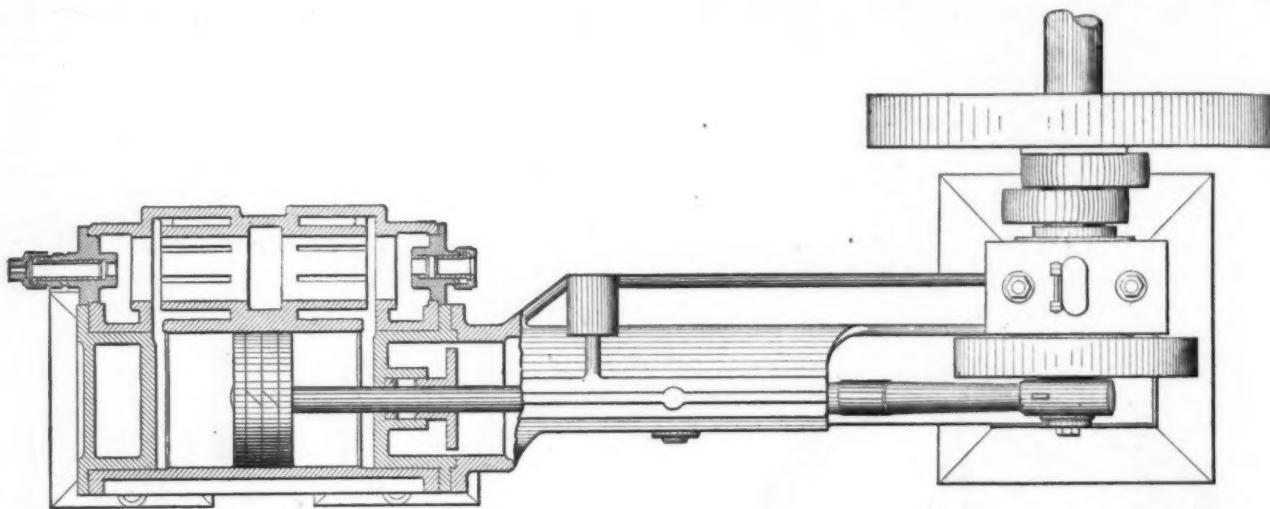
Sectional Plan through Cylinder and Steam Chest.
